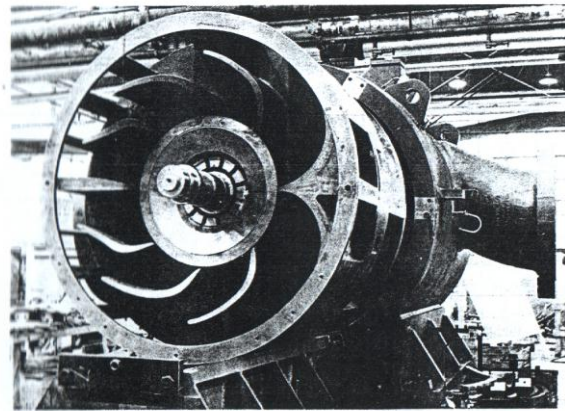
Vertically split centrifugal compressor showing method of removal of internals. Photo courtesy of Dresser Clark Division, Dresser Industries Incorporated, Olean, NY.
